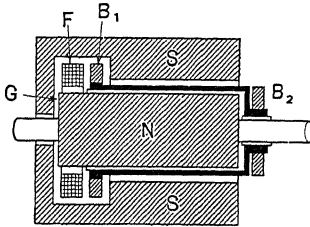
Drum type of unipolar machine with revolving magnet core and auxiliary end gap, section.
